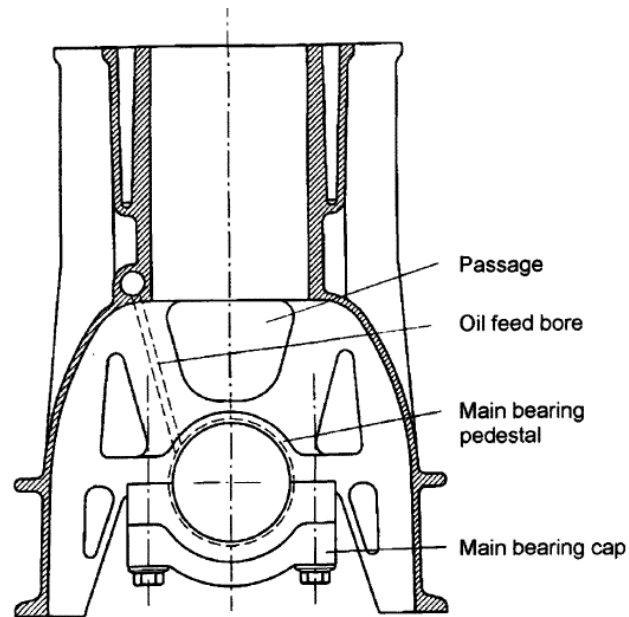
Main bearing pedestal/main bearing cap [11].
